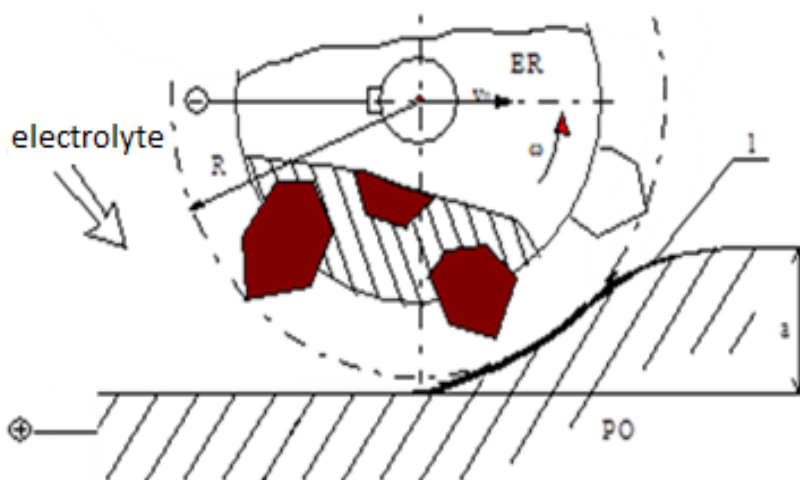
Scheme of machining area in electrochemical grinding process when using a cylindrical grinding wheel: 1– dissolute surface layer removed by abrasive grains; PO – workpiece; ER – electrode grinding-tool
